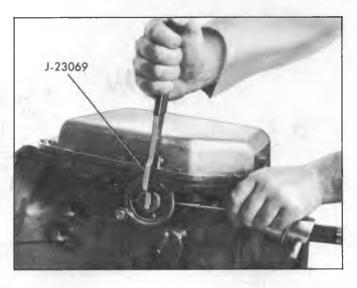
M-Removing Accumulator Piston Cover Retaining Ring
